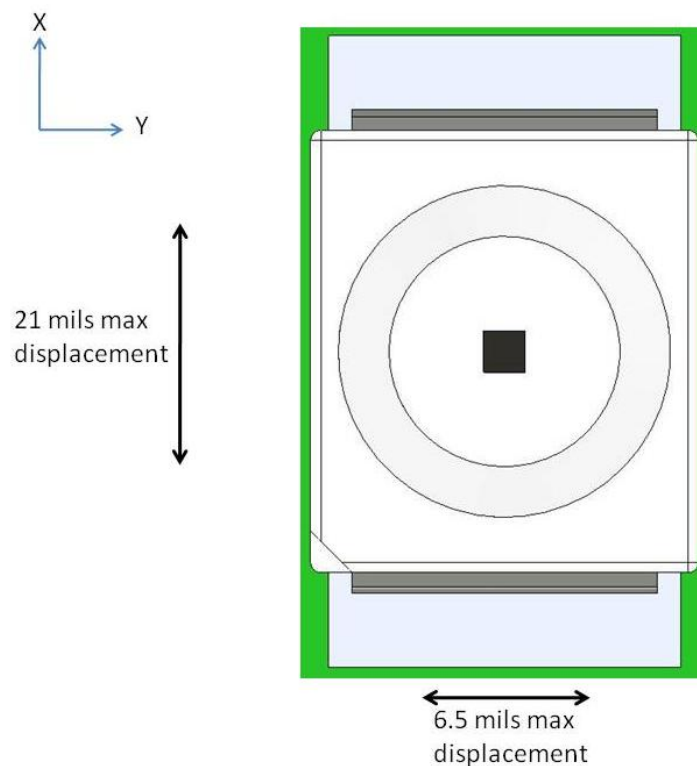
Illustration of a beacon (VSML3710) on its solder pads.
